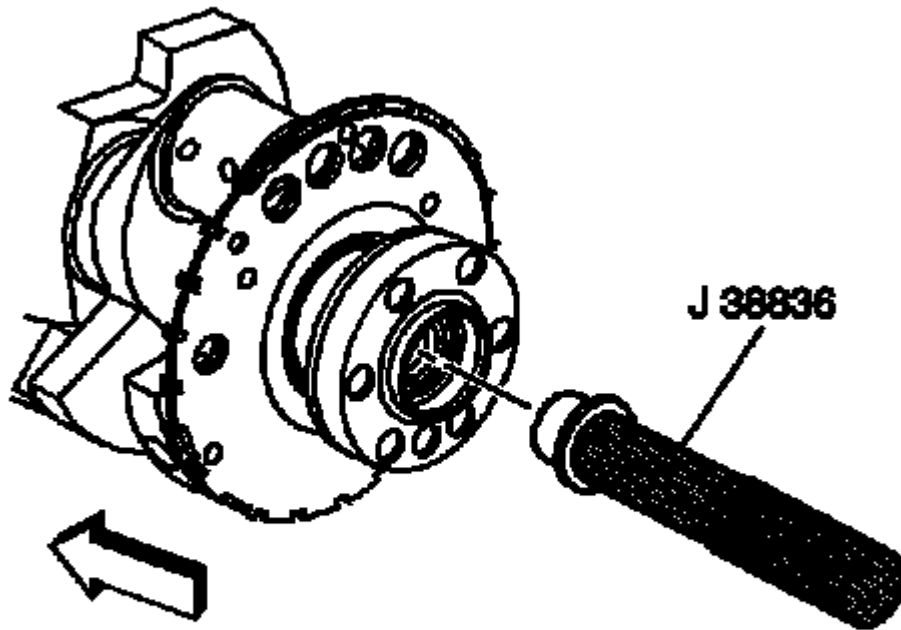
Installing Pilot Bearing Using J 38836 (without RPO HP2)
